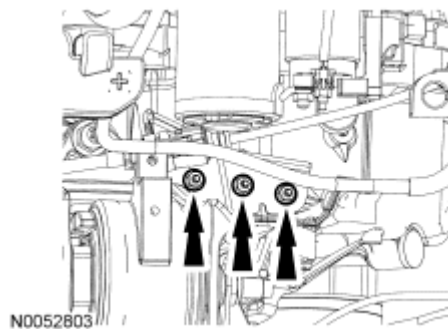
Identifying Selector Lever Cable Bracket Bolts & Nuts
